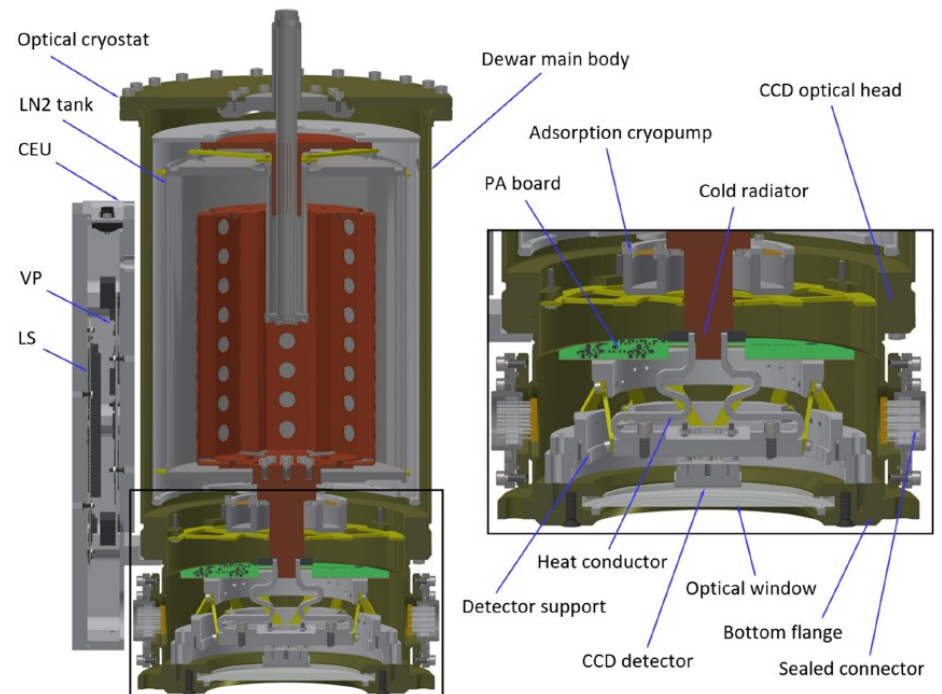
A 3D cut view of the CCD camera: full view of the camera (left) and zoomed view of the optical head (right).
